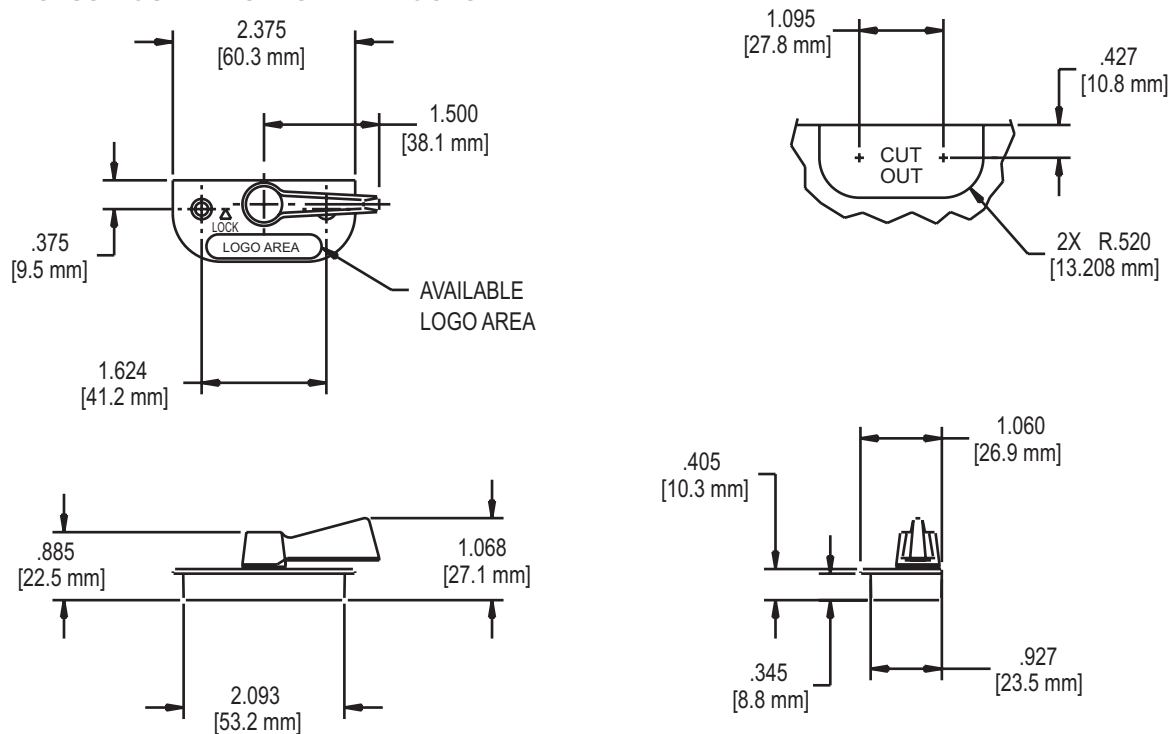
RECESS MOUNTED CHECK RAIL LOCKS
